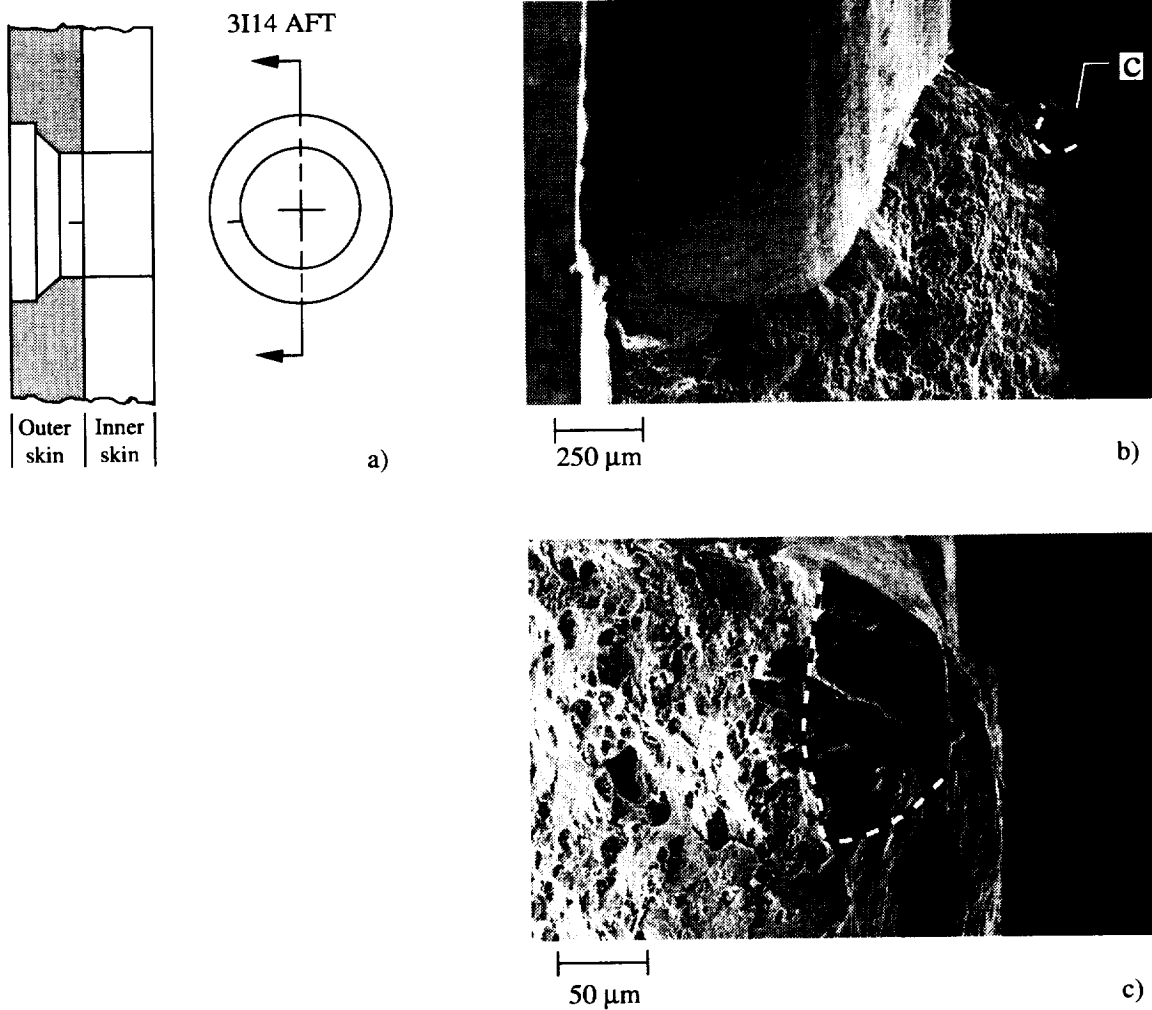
a) The schematic shows the rivet hole 3114 configuration and the location of the outer skin fatigue crack oriented in the aft direction below the 9 o'clock position. b) The SEM micrograph shows the fatigue crack at the inboard corner of the rivet hole. The dashed line marks the fatigue crack front. c) The SEM micrograph shows the region of crack initiation at the rivet hole shank region "c" in Figure 9.37.b. The dashed line marks the fatigue crack front.
